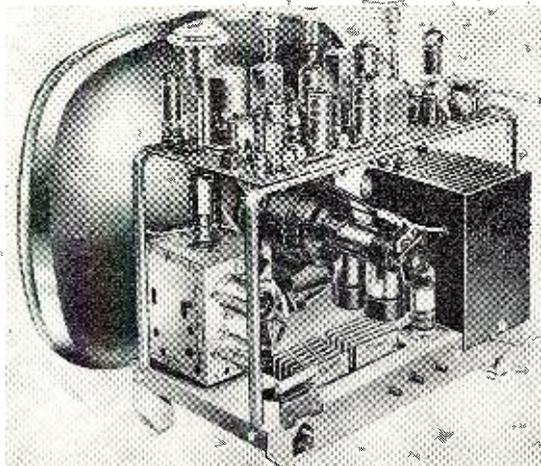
The novel "two-story" chassis, with the top portion consisting of components mounted on a printed-wiring board, developed by Sylvania for narrow cabinet depth with 110° tubes.
